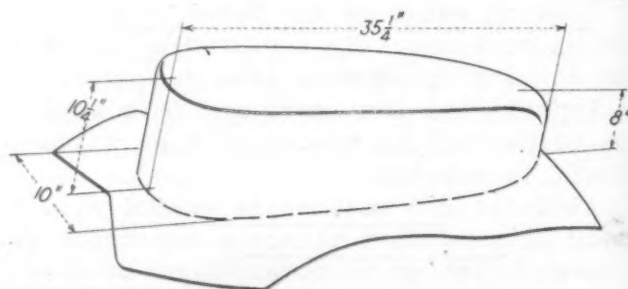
Parts fabricated from magnesium sheets and tubes by Dow Chemical Co.
